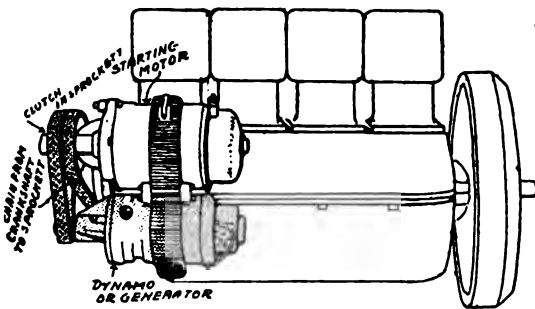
Showing application of starting motor to crank shaft by chain and sprocket. Note clutch is in sprocket. Both chain and sprocket run with engine, but clutch in sprocket cuts out motor after engine is started.
